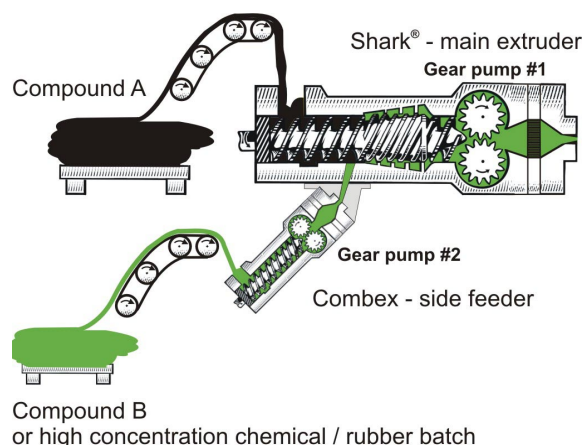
Typical schematic of the Shark® extruder gear pump system with Combex side feeder
